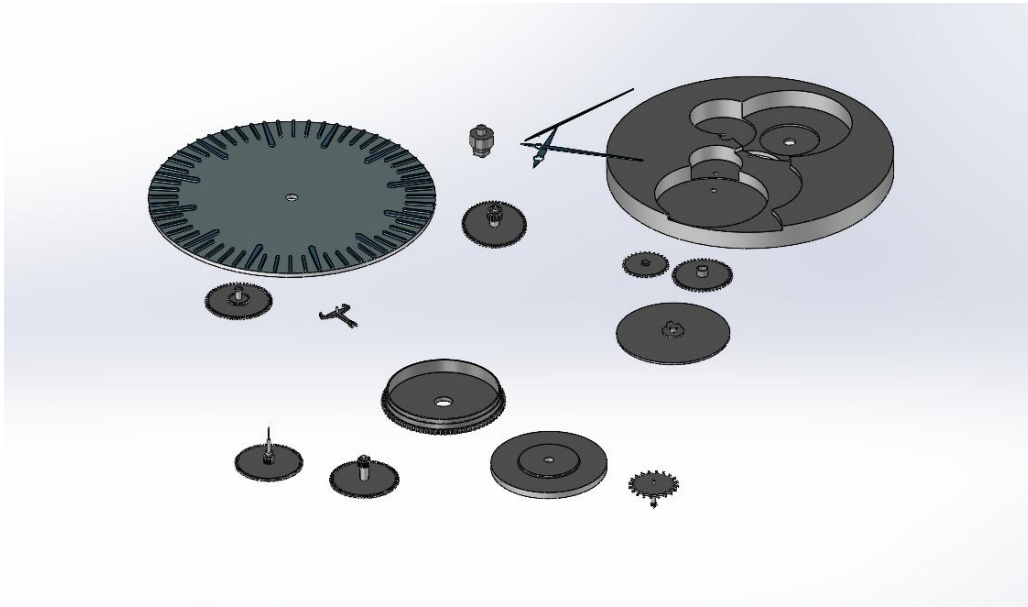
Exploded view for the final assembly of the mechanical watch.
